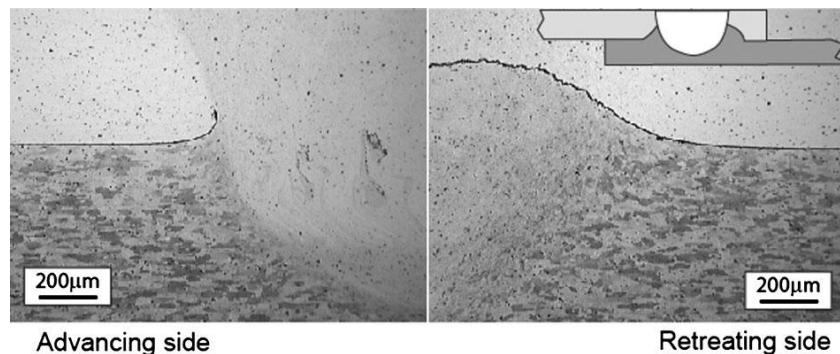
Lap weld defects showing hooking on advancing side and plate thinning on retreating side in lap welds between AA 7075 (upper) and AA 2024 (lower) alloys [51].
